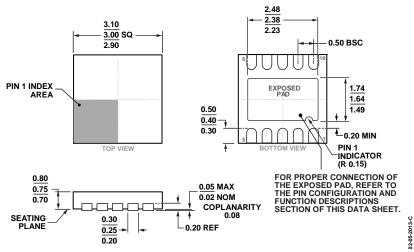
10-Lead Frame Chip Scale Package [LFCSP_WD] 3 mm × 3mm Body, Very Thin, Dual Lead (CP-10-9) Dimensions shown in millimeters
